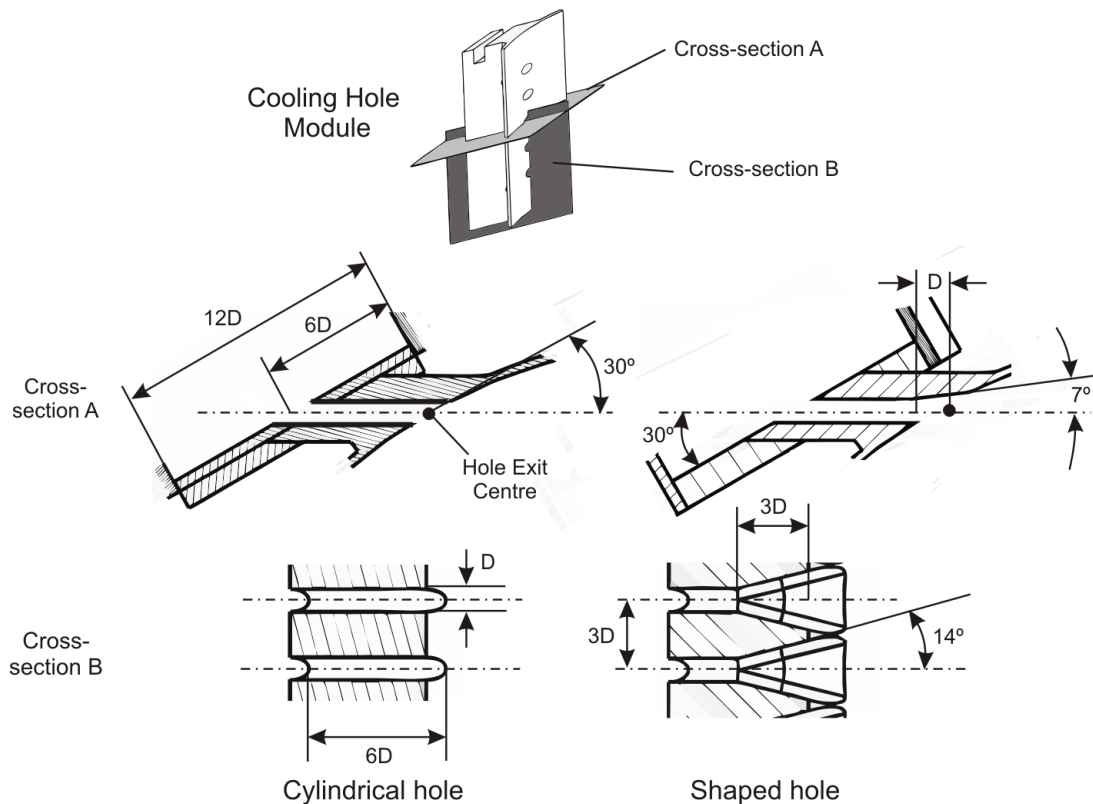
The cooling hole geometries with crossflow, (upper) the removable module, (lower-left) cylindrical hole dimensions and (lower-right) shaped hole dimensions.
